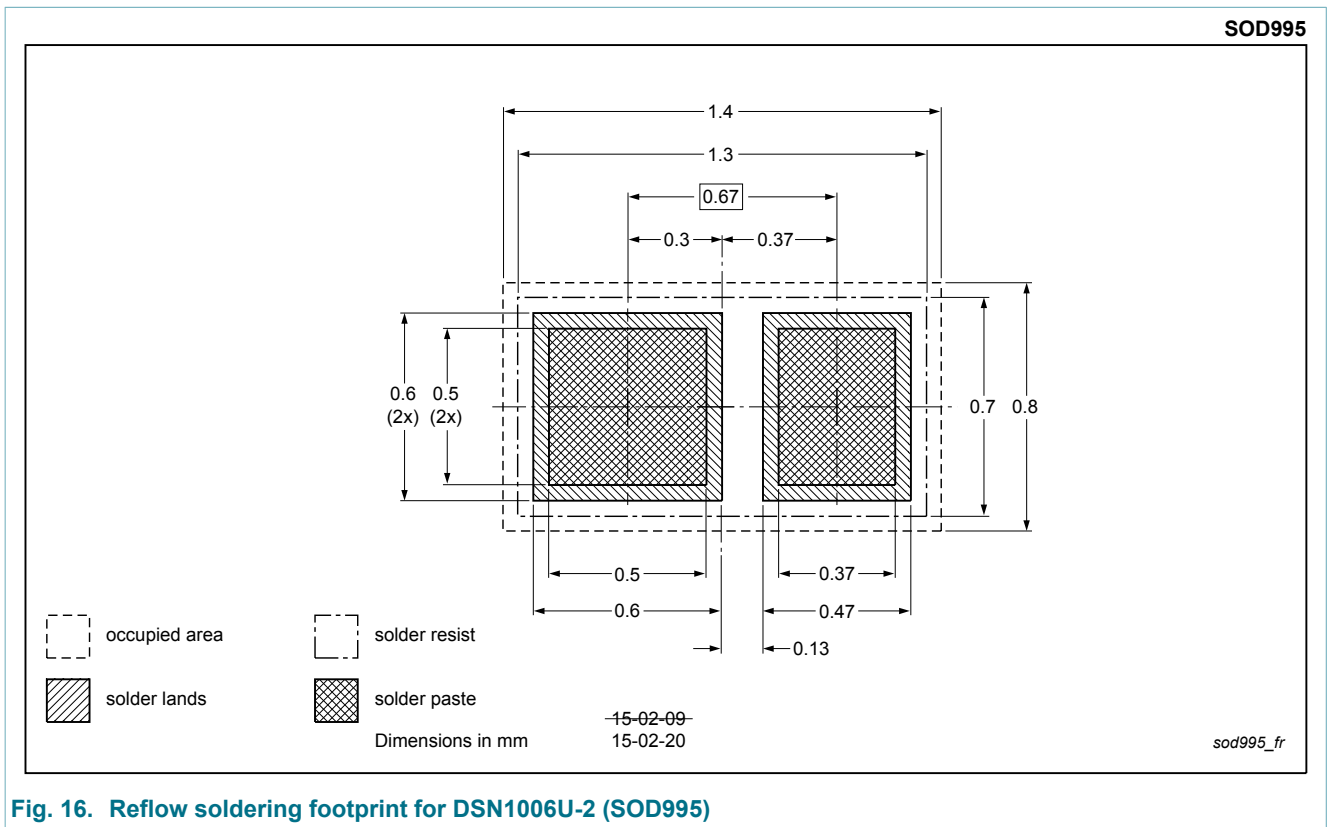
Reflow soldering footprint for DSN1006U-2 (SOD995)
